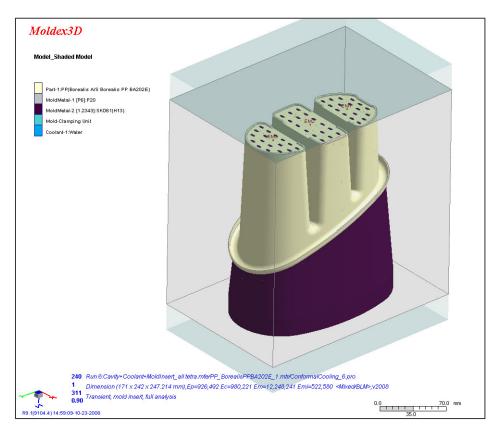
CAD model of the cutlery drainer insert using Moldex3D
